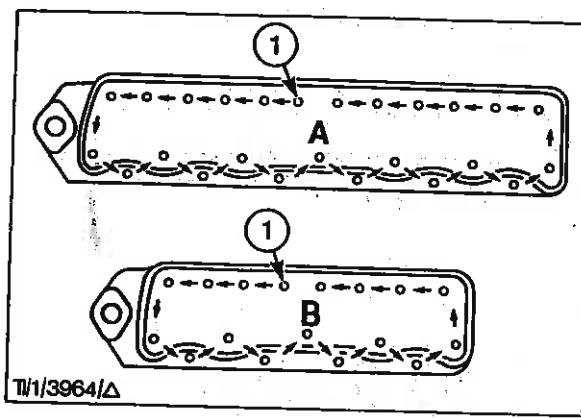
Cylinder Head Bolts Tightening Sequence
